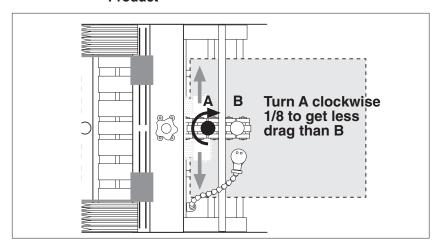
Turning Knob "A" Clockwise to Get Slight Drag
